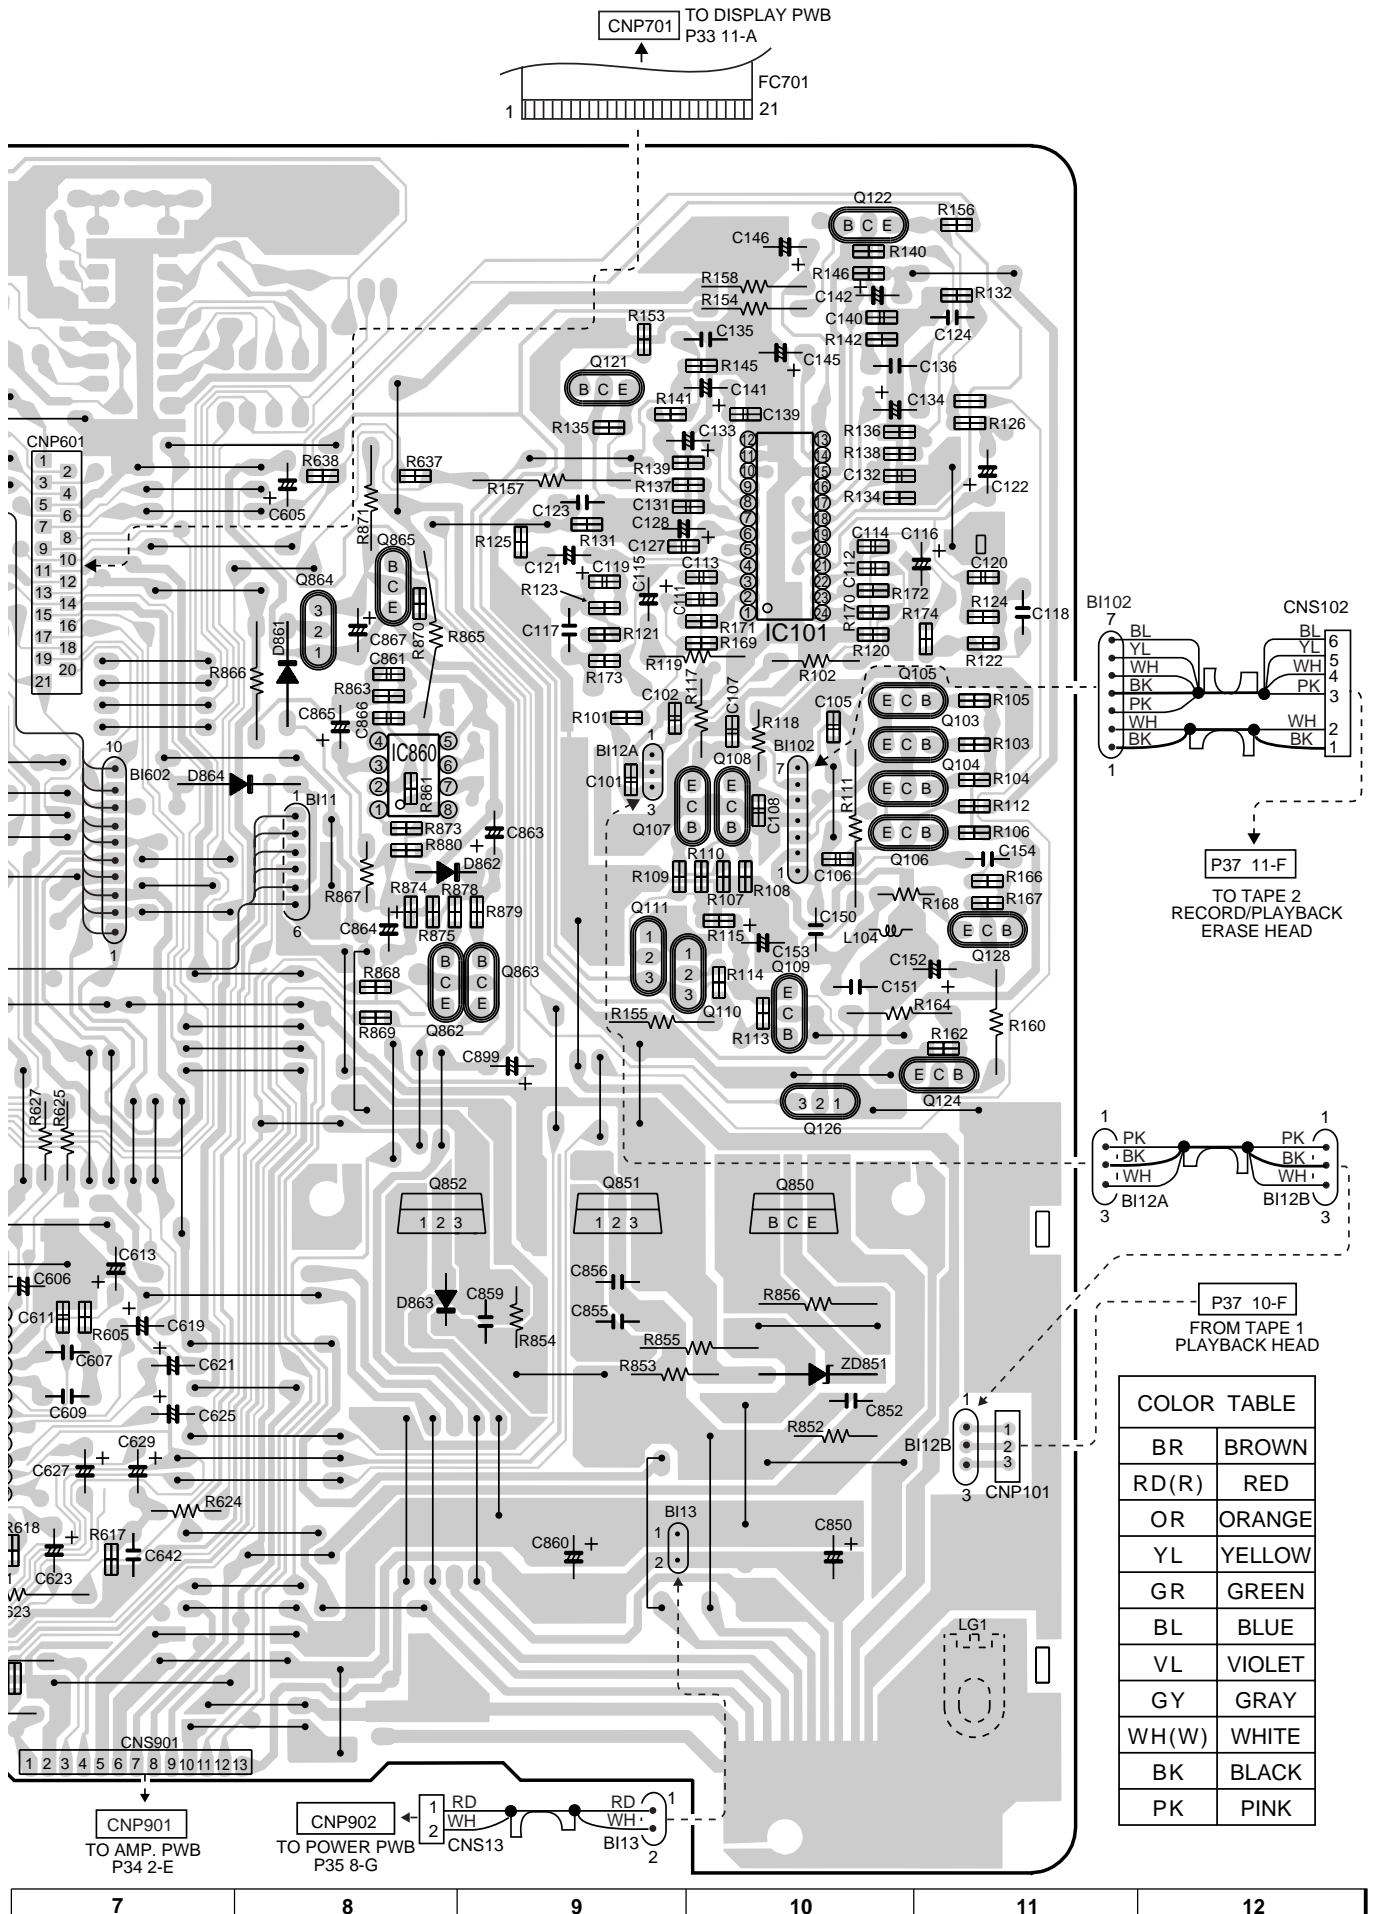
WIRING SIDE OF P.W.BOARD (3/9)
